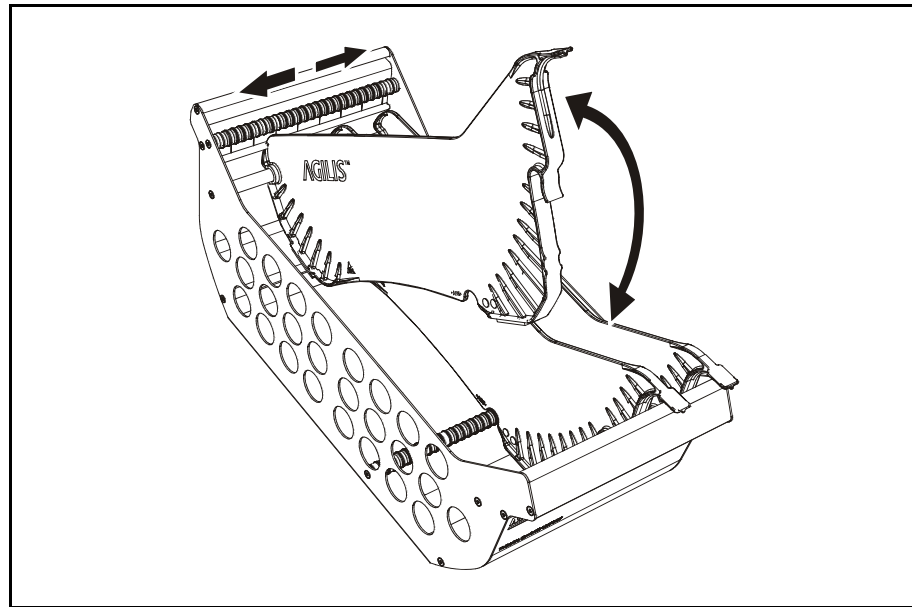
Movable inner walls on a wide 13 inch bin.
